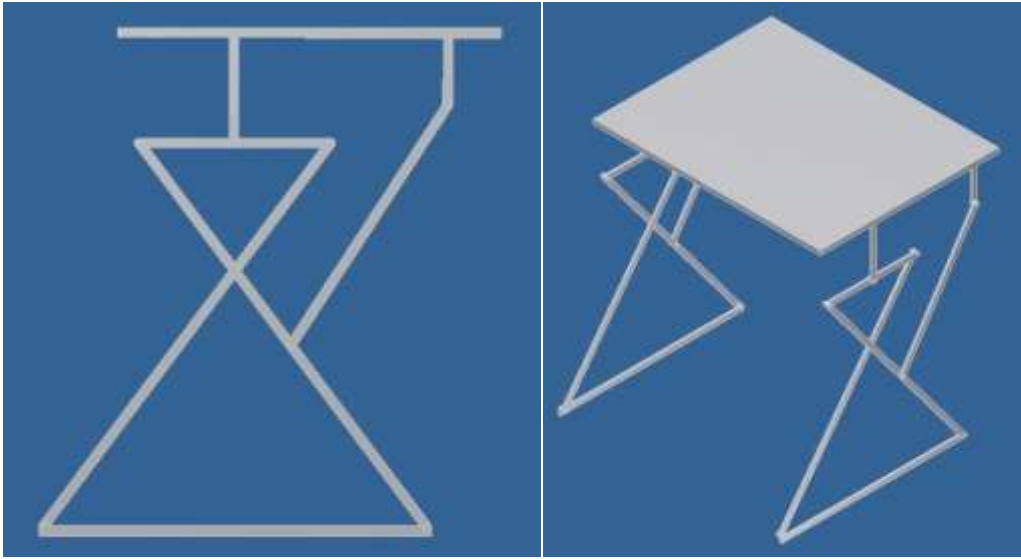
(Left) Side view of mechanism (Right) Table design using this mechanism top corner view
